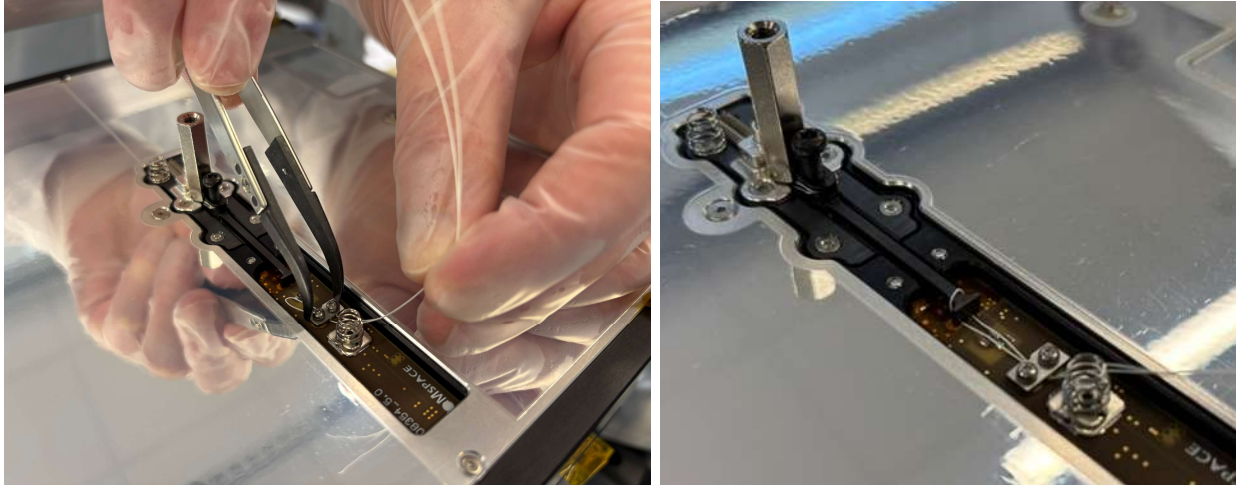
Burn Wire tucked through Clamp and HDRM PCB and mounted around Sleigh's handle.
